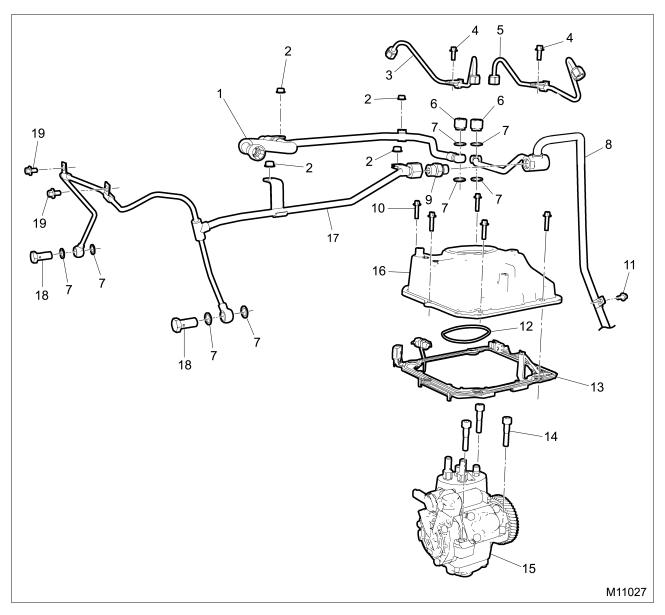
High-pressure Fuel Pump (HPFP) assembly and tubing
